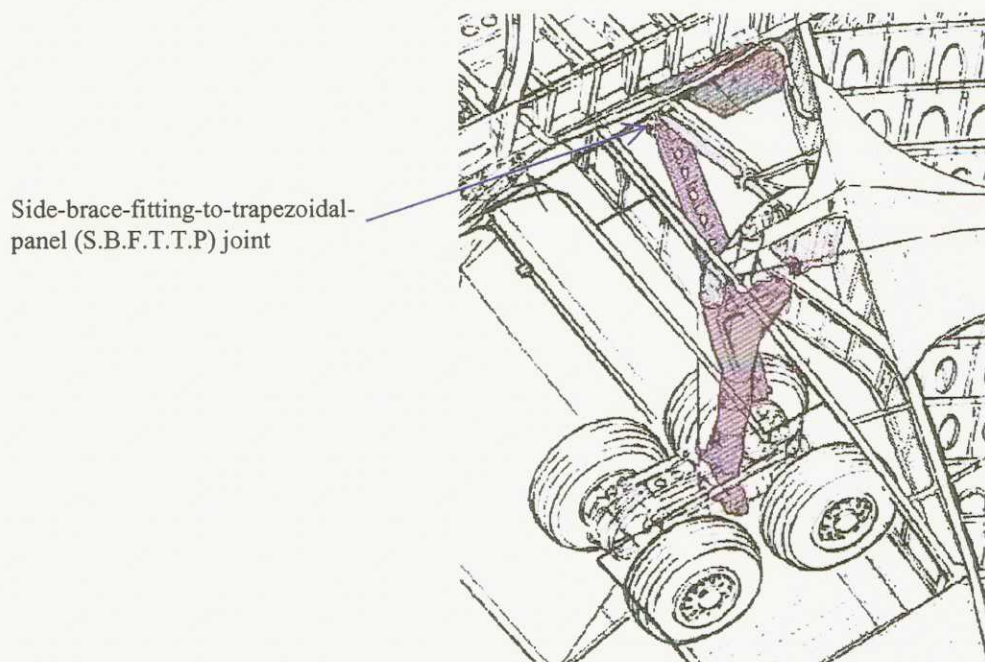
Location of the side-brace-fitting-to-trap-panel joint
